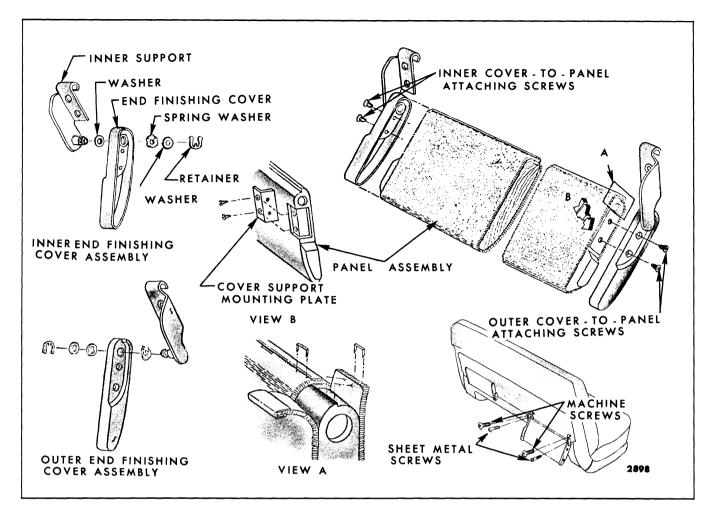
Foot Rest Assembly - Cadillac 6CB69 Styles
